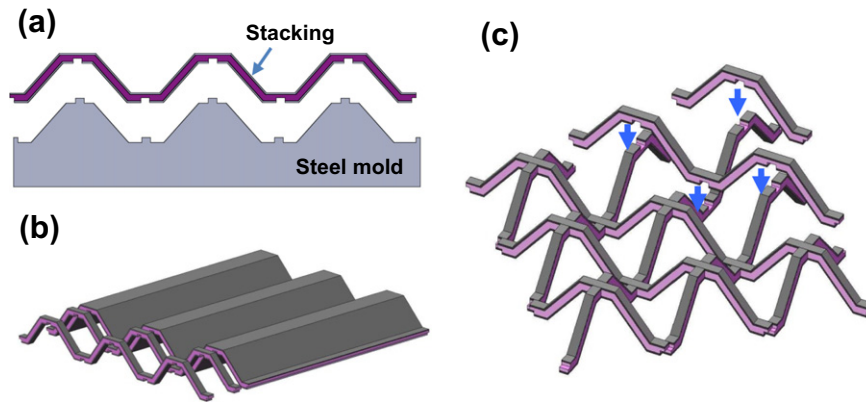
Fabrication approach with corrugated foam sandwich plate (Pattern II): (a) fabricating a corrugated foam sandwich plate with a specially designed steel mold; (b) cutting foam sandwich strips; and (c) strips slotting together.
